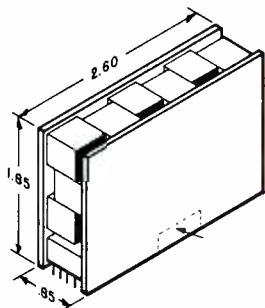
Universal-logic package of 16 micromodules in mounting boards.
